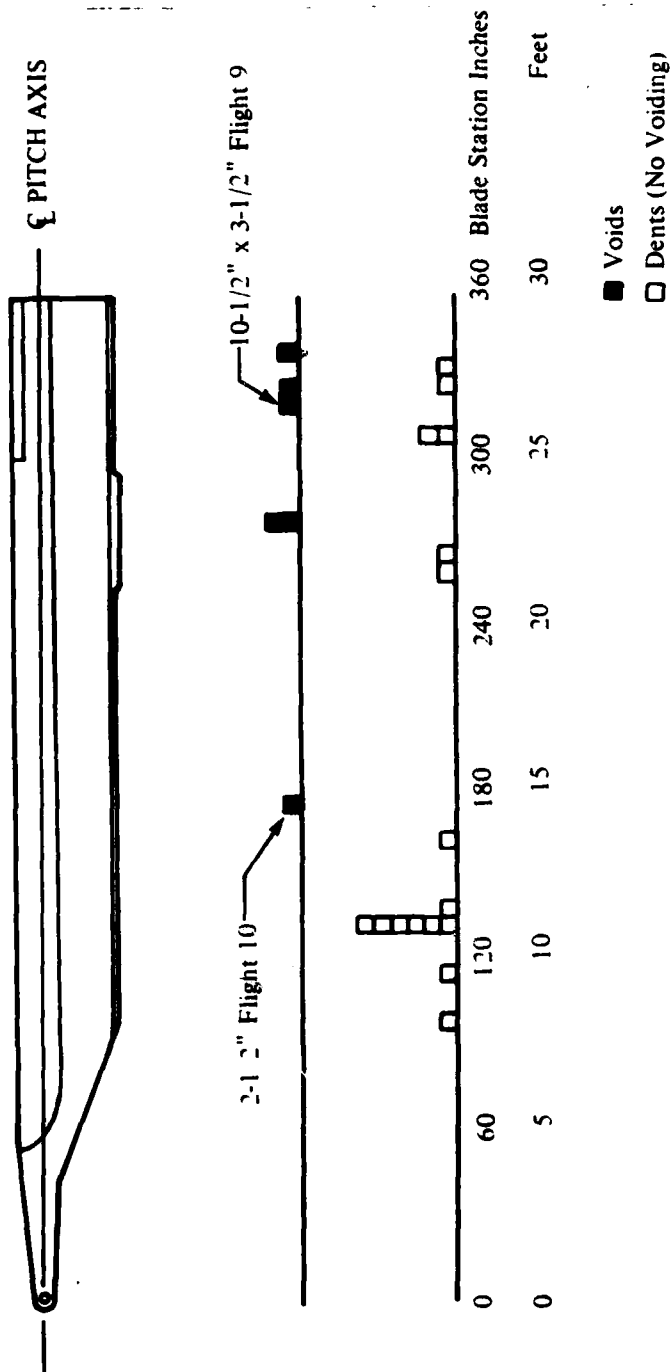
Ice Damage to the Bottom of the Aft Rotor Blades
